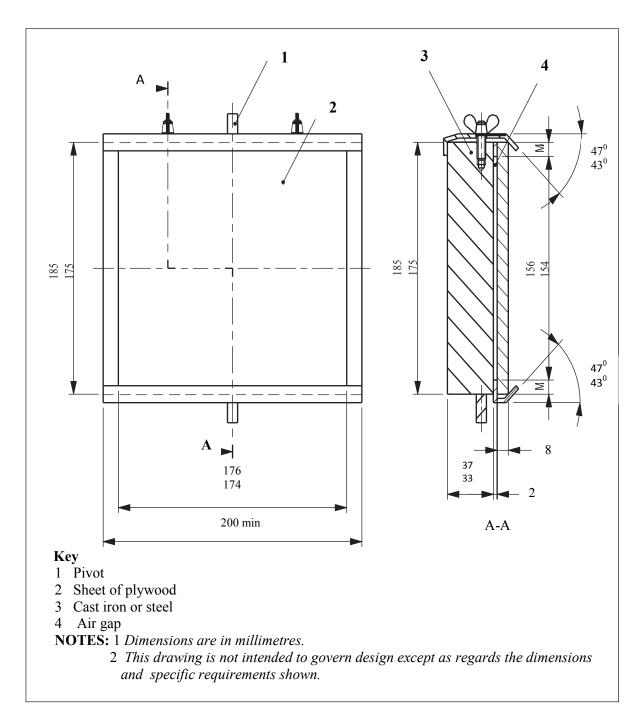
Pendulum impact test: Constructional details of mounting support for test samples (see 20)
